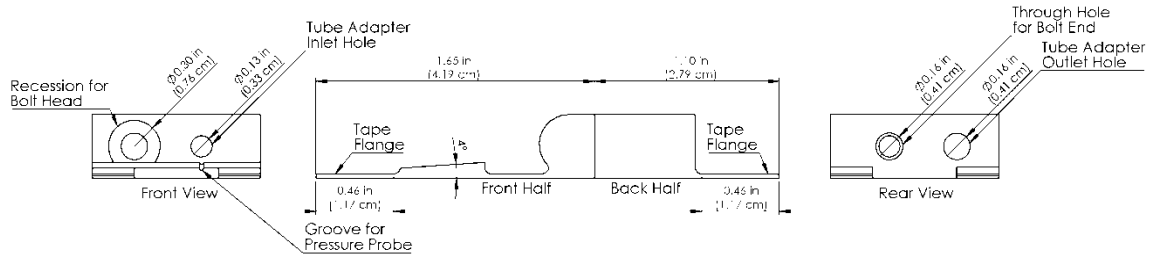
Focused View of the Two Sections of the Preston Tube Mount Body.
